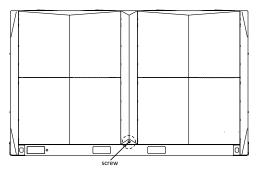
Removing the Center Panel Screw for Medium and Large Cabinets
